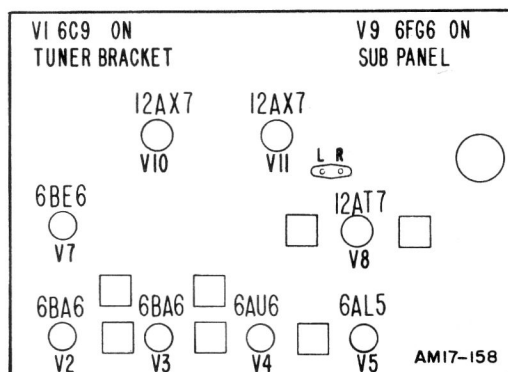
Tube Layout J105X Tuner and Amplifier Chassis
